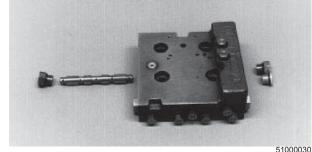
Multi-function Block with Servo Pressure Supply Shuttle Spool
